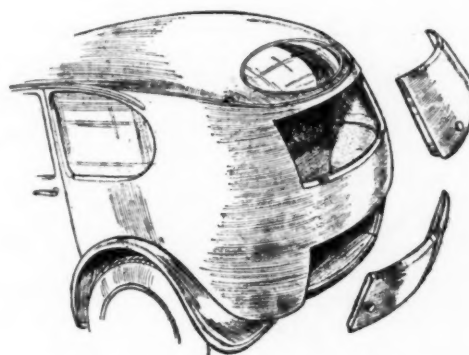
REAR PART OF THE VULCAN CAR BODY
